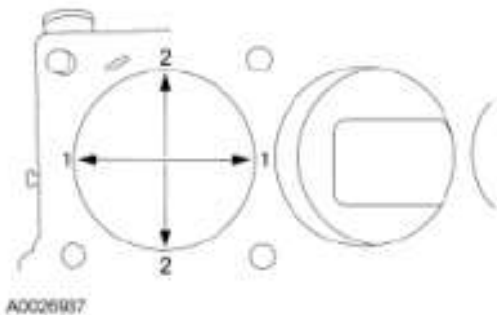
Measuring Cylinder Bore Top, Middle And Bottom Of Piston Ring Travel
